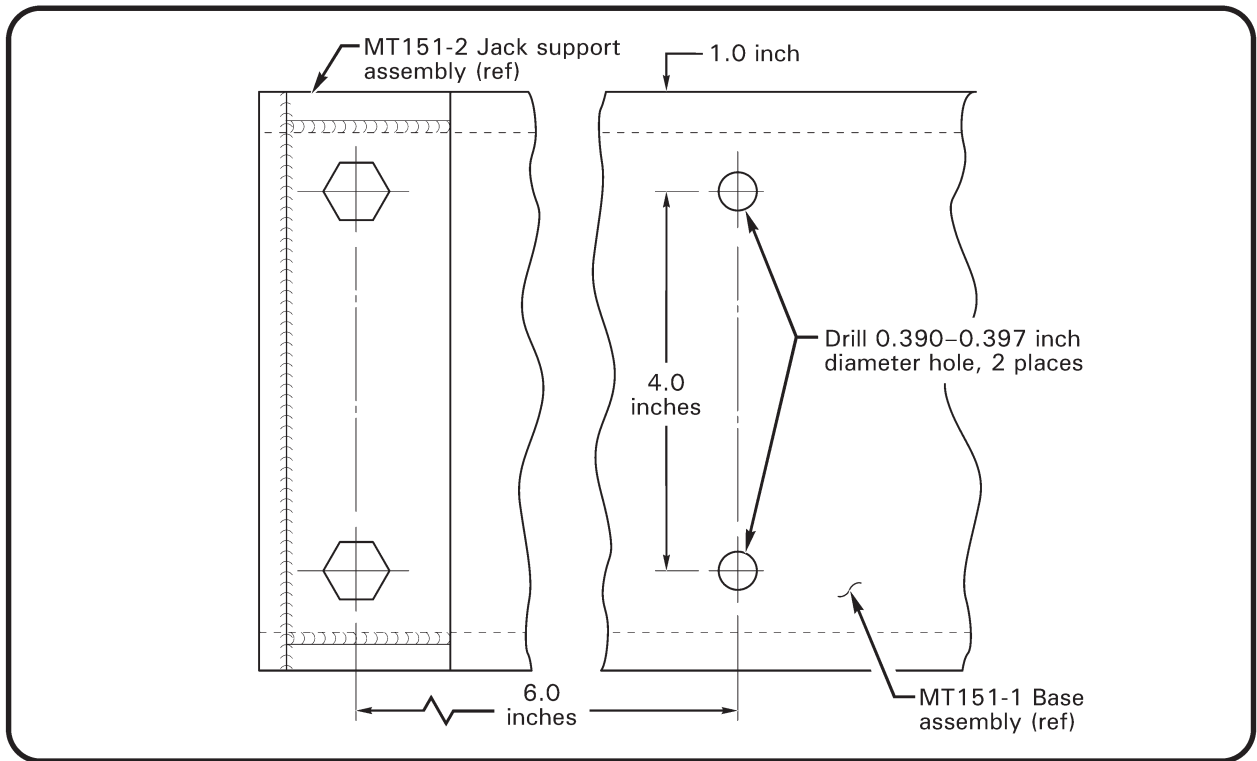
Locating MT151-2 Jack support assembly (with reference dimensions shown)
